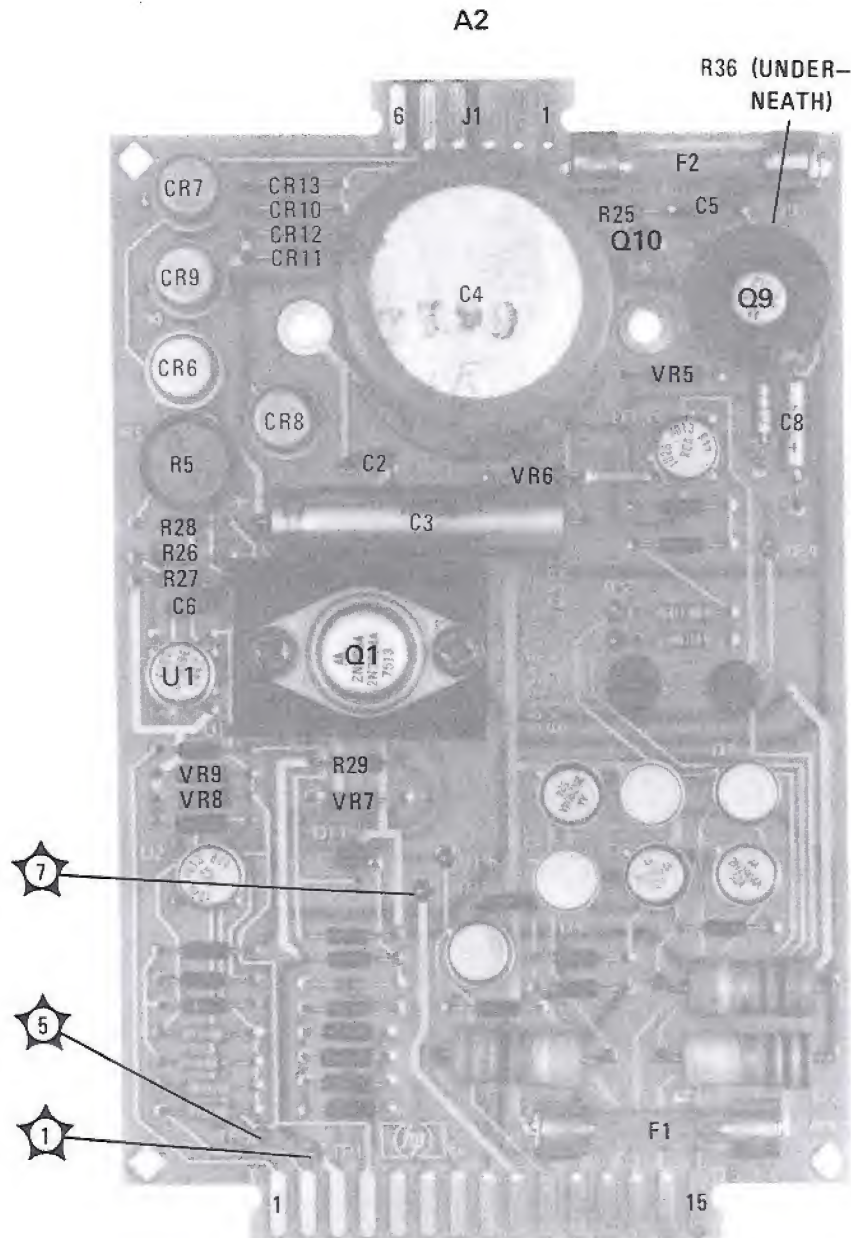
A2 Power Supply Assembly Amplifiers and Switch Driver Circuits Parts Locations
